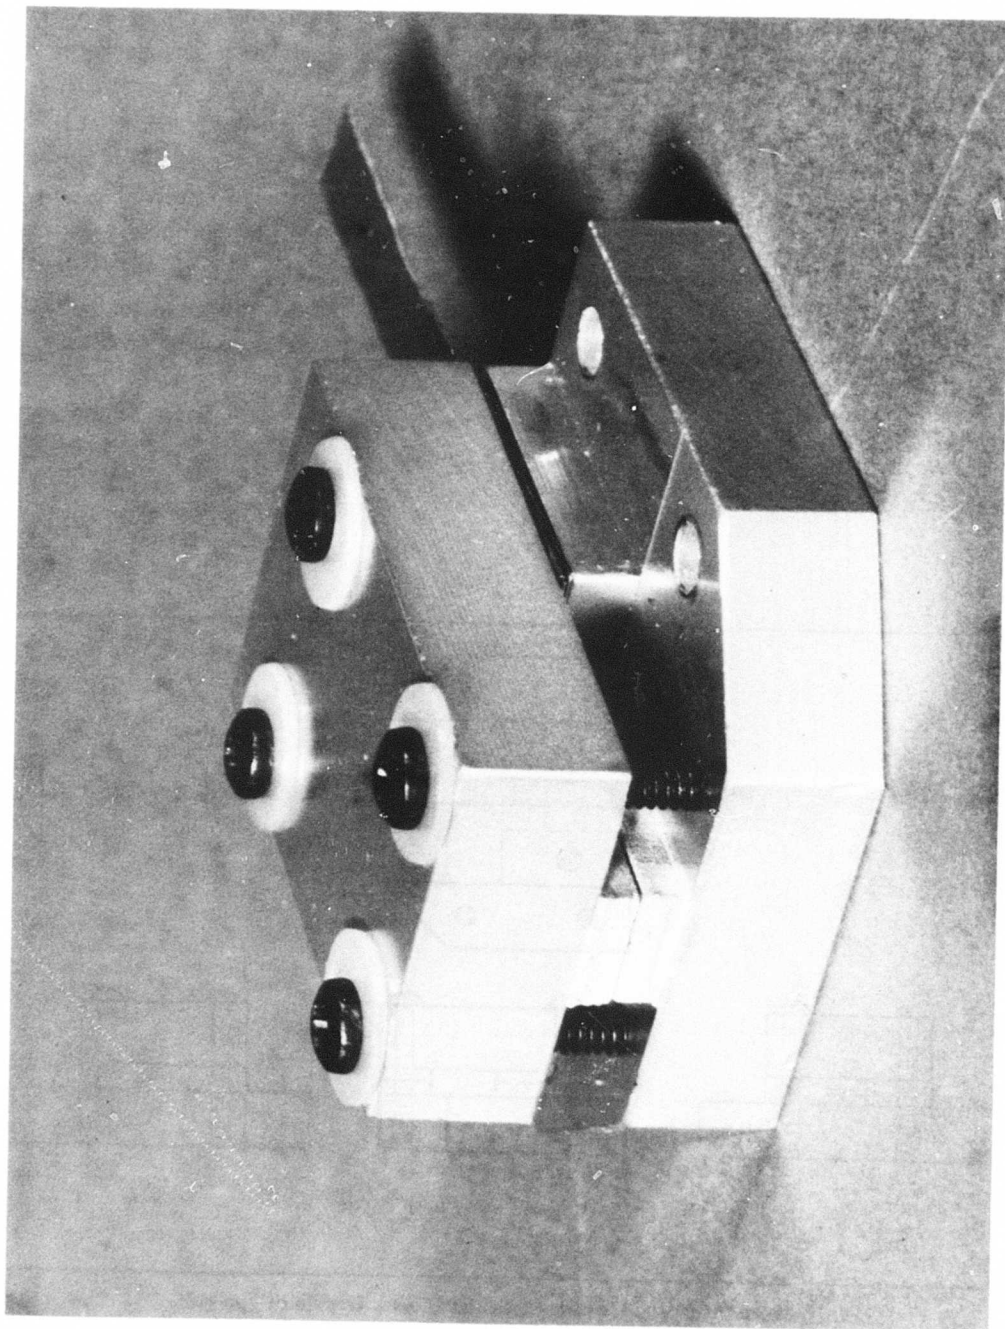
Assembled Double-Sided Heat Sink (Type I)
